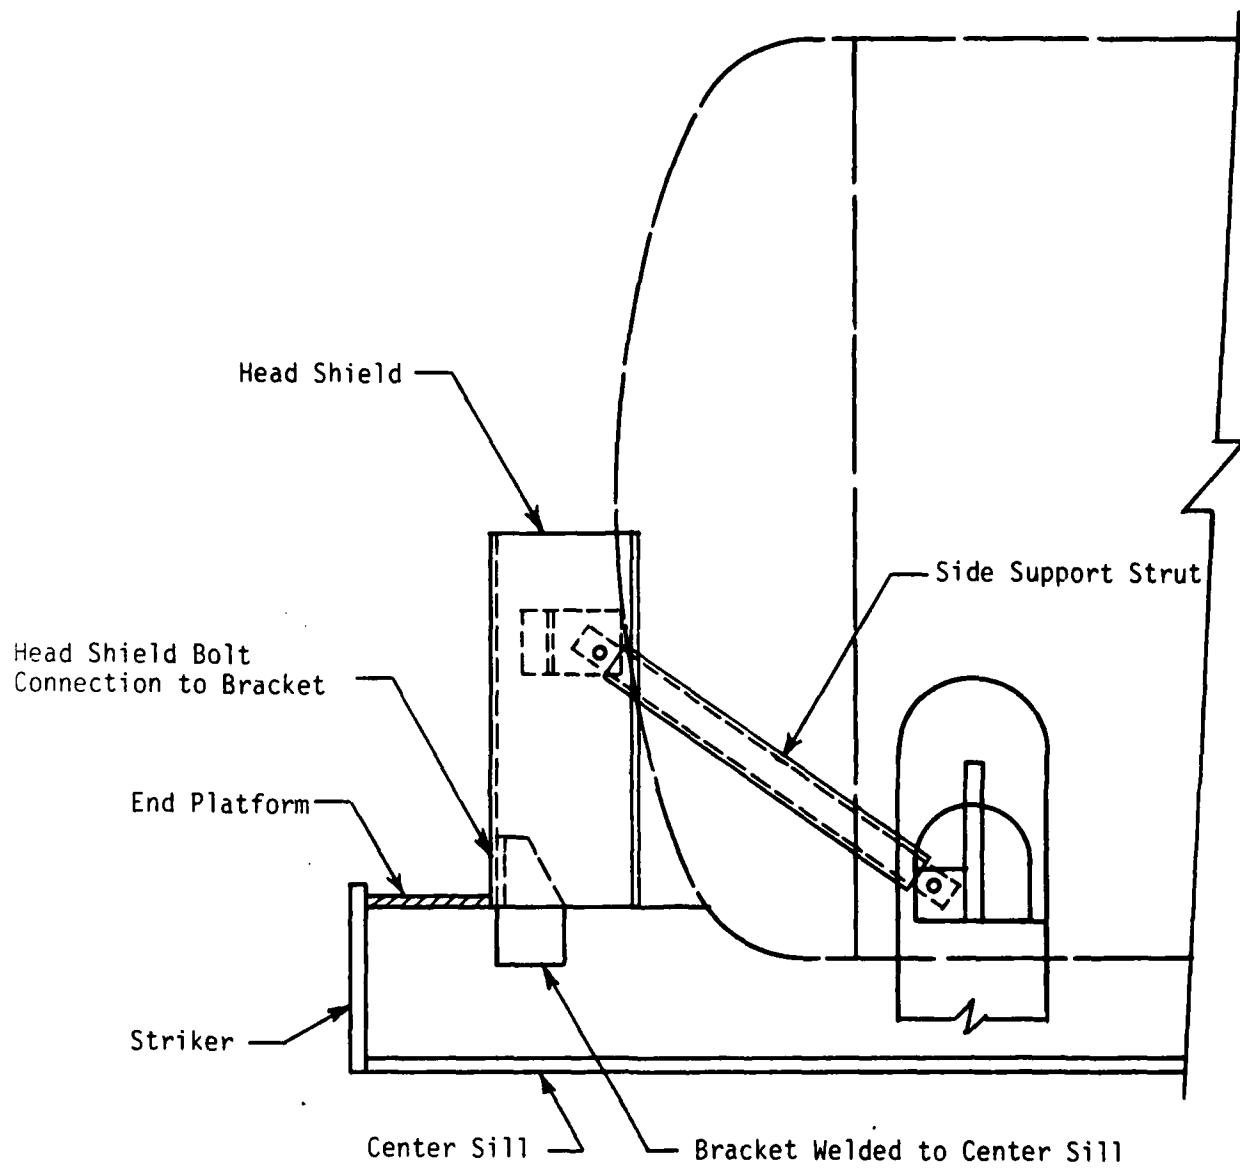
HEAD SHIELD ATTACHMENT DETAILS
